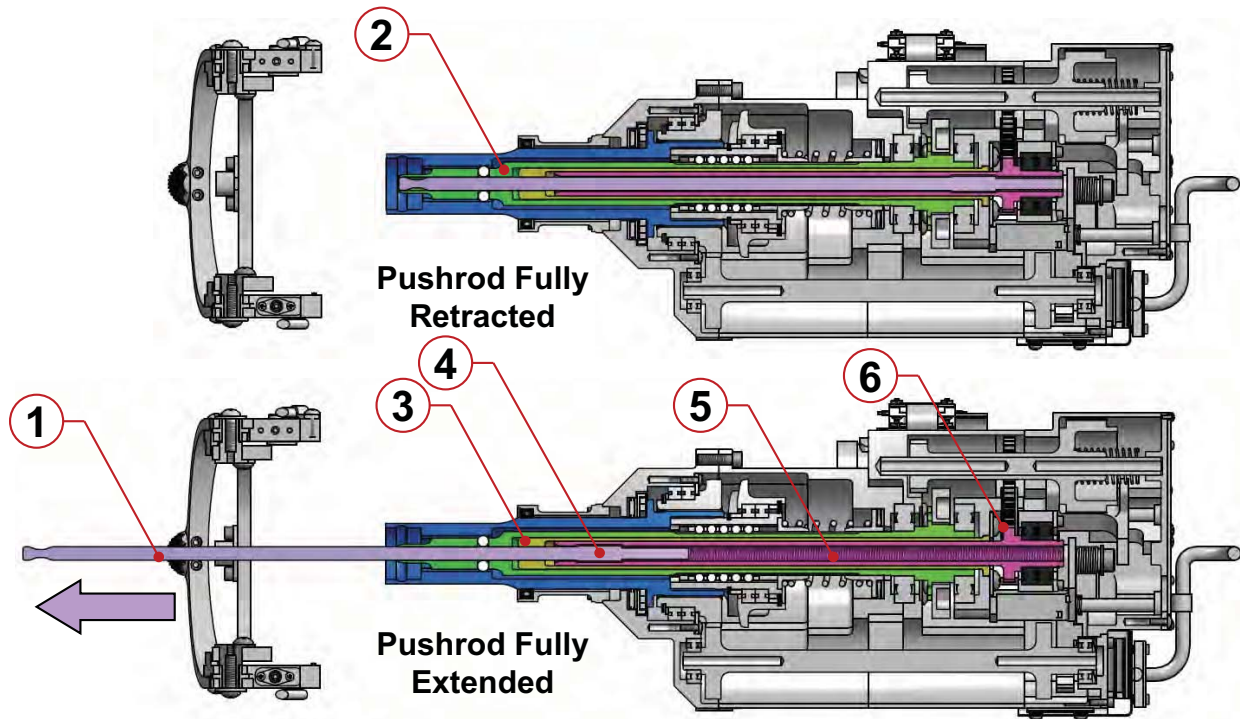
ROPEC Drill Pushrod Subsystem (1) Pushrod (2) Locked Balls (3) Auger Chuck (4) Unlocked Balls (5) Breakoff Shaft
